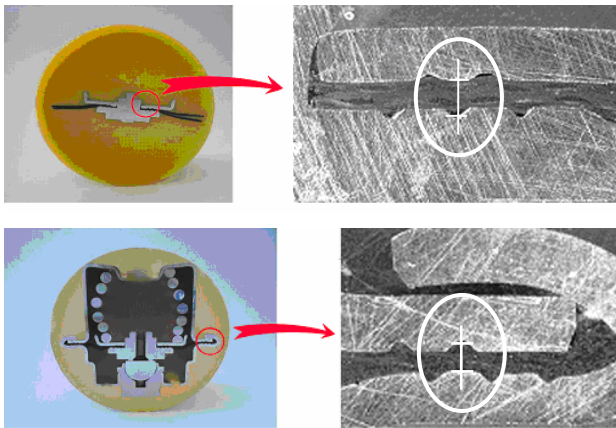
Control of the compressed diaphragm squeeze in the FPR body- and final (crimped) assembly
